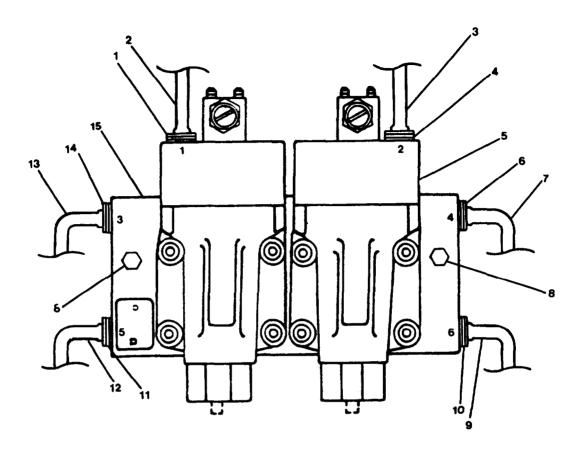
Gearmate Control Panel Three-Way Valve.
